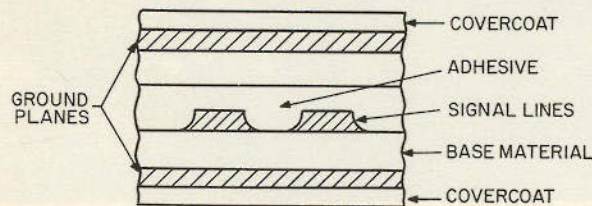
Cross section of class III, type III, multilayer flexible printed wiring.
